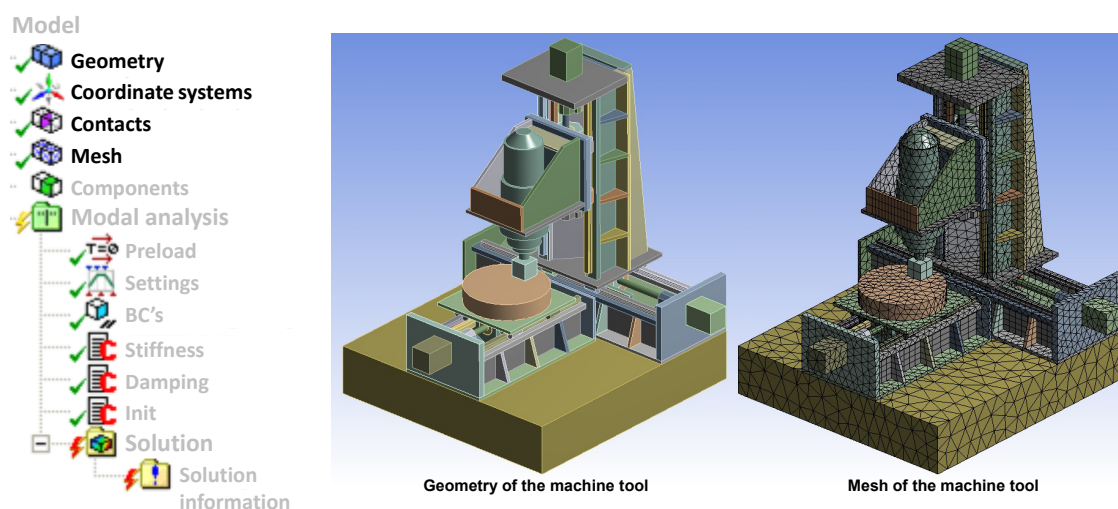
Geometry and mesh of a three-axis machine tool.
